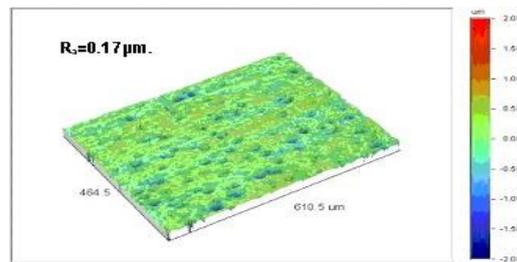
(a): The three dimensional view of ground (SiC wheel polished) plate surface.
